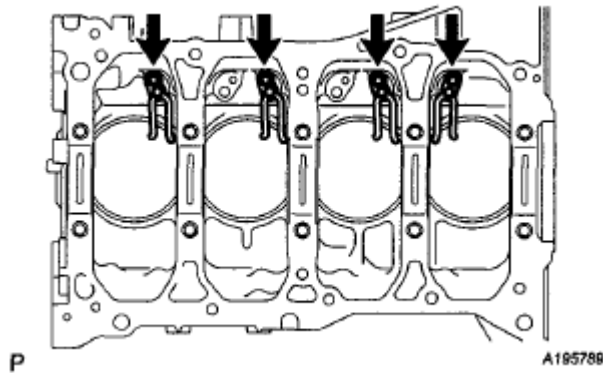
Locating No. 2 Oil Nozzles Bolts
